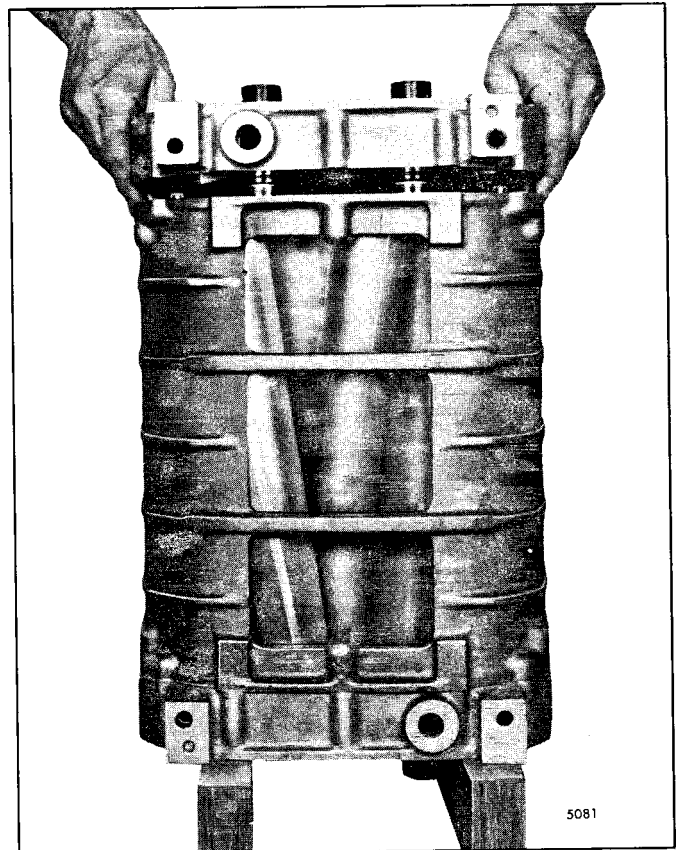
Installing Rear End Plate on Blower Rotors and Housing
